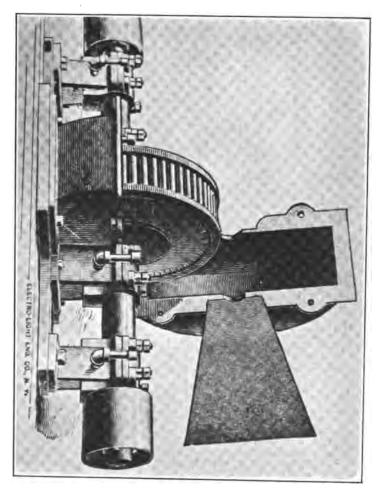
Cotton Drying Machine (Nobel's Explosives Co.)
